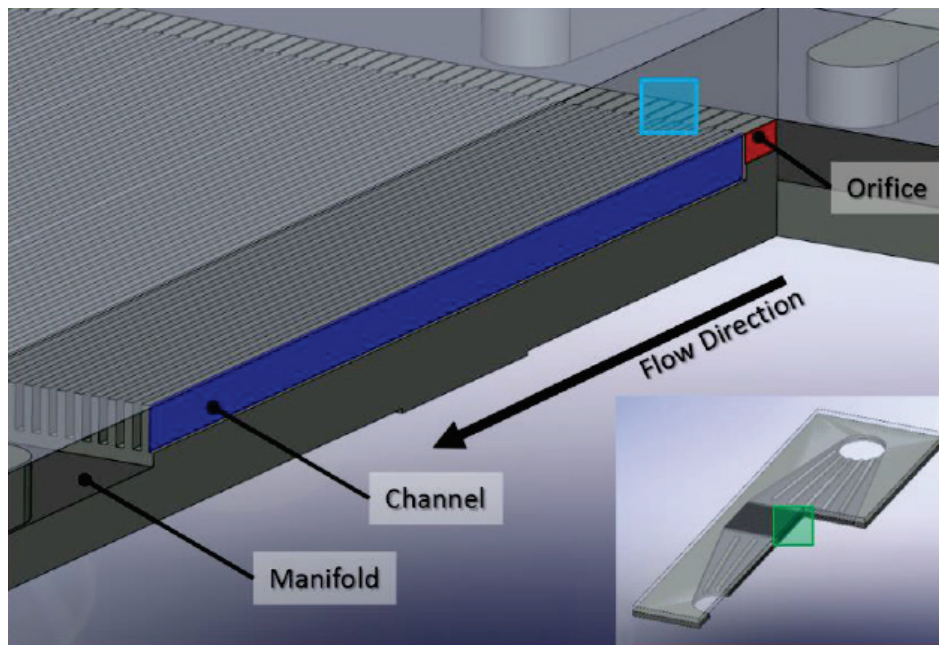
Cutaway view showing test section channel and orifice [7].
